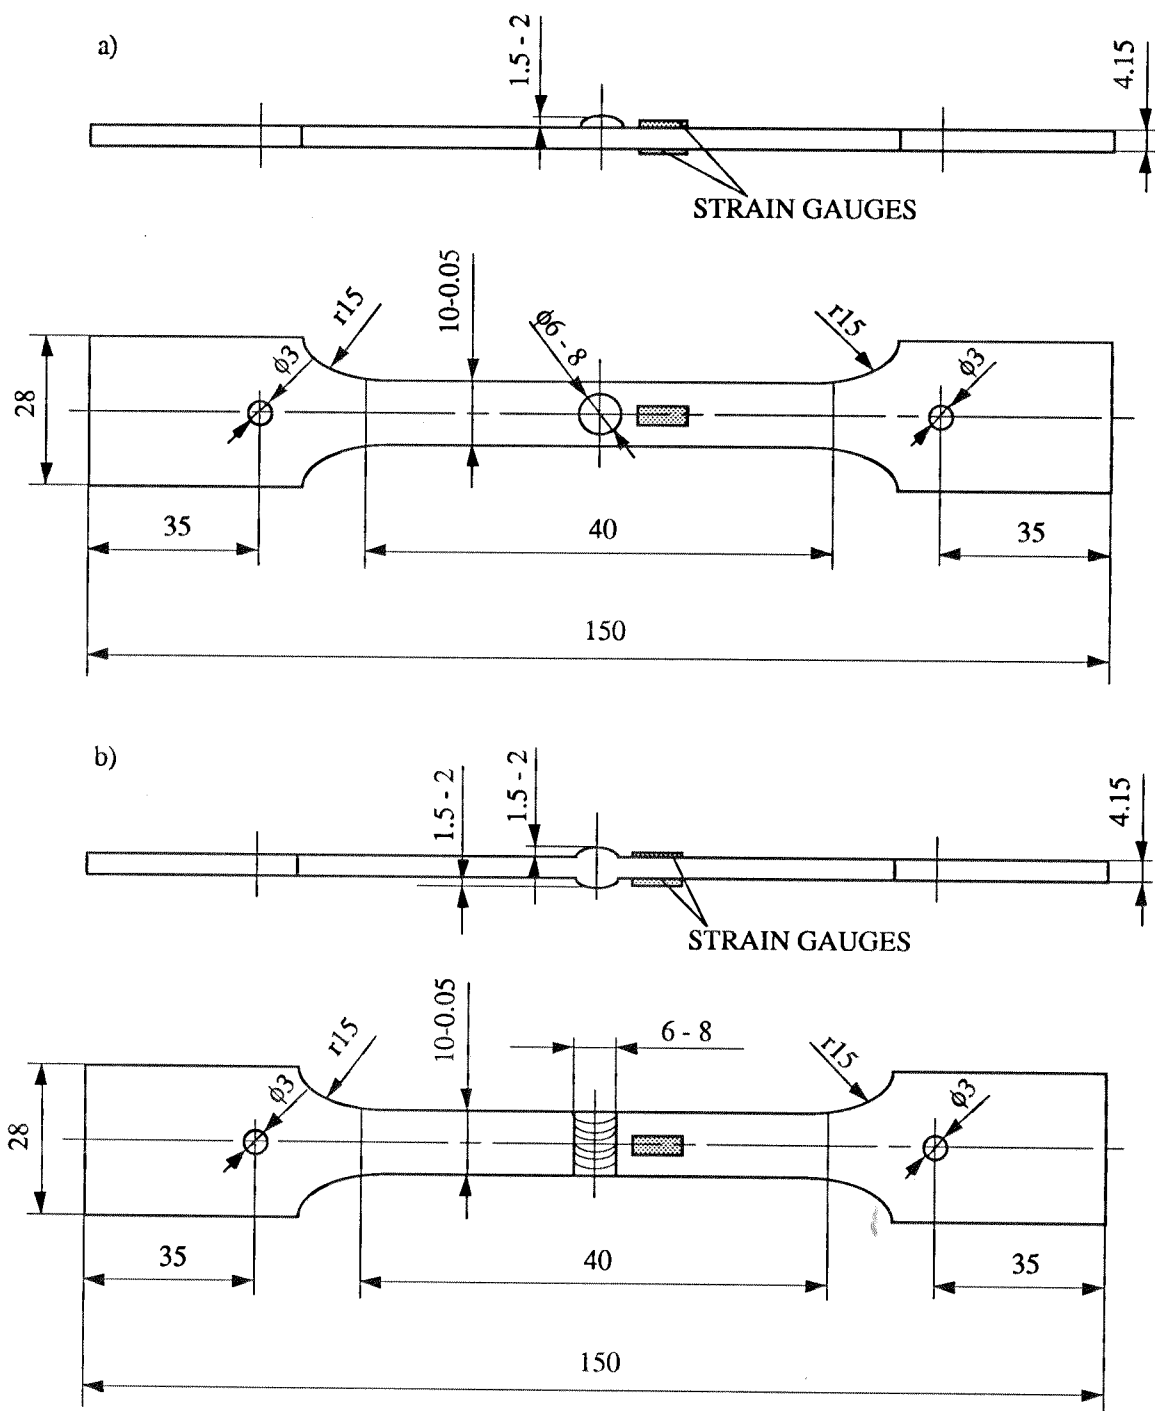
Fatigue test specimens; a) with button-shaped beat-on-plate for laser shock precessing, b) with double beat-on-plate for shot peening.
